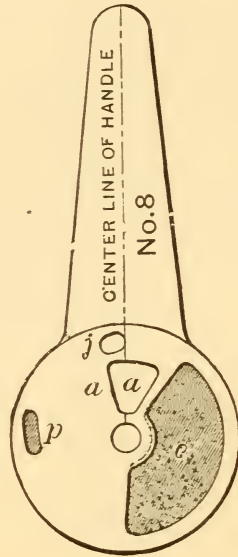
SHOWING BOTTOM SIDE OF ROTARY OF D 8 VALVE.
